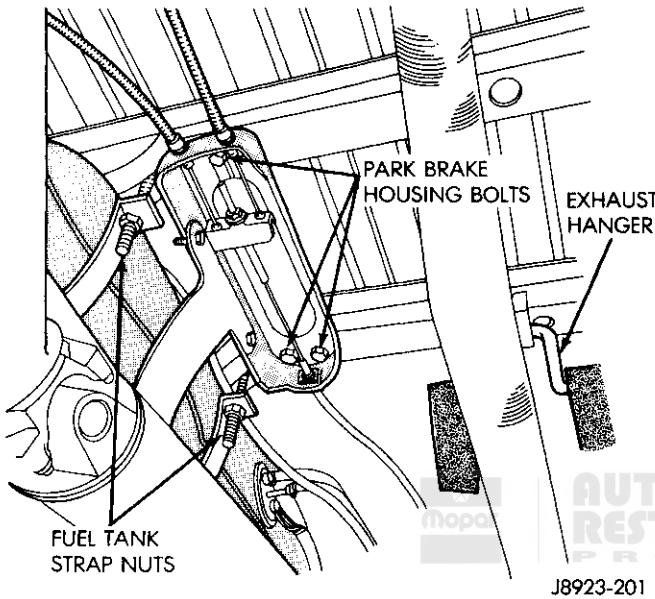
Brake Cable Housing, Fuel Tank Strap And Exhaust Hanger Bolt Locations
